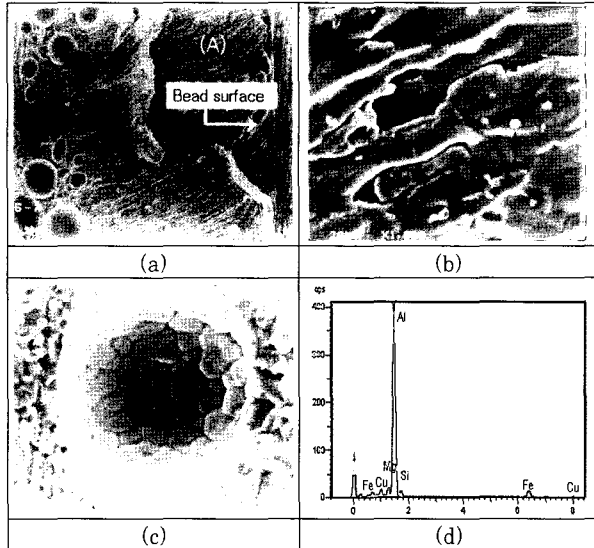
SEM microfractographs of 6N01-7N01 welds, (a) fracture facet of the crack, (b) A part on (a), (c) porosity on (a) and (d) EDX a nalysis of the particle on (b)
